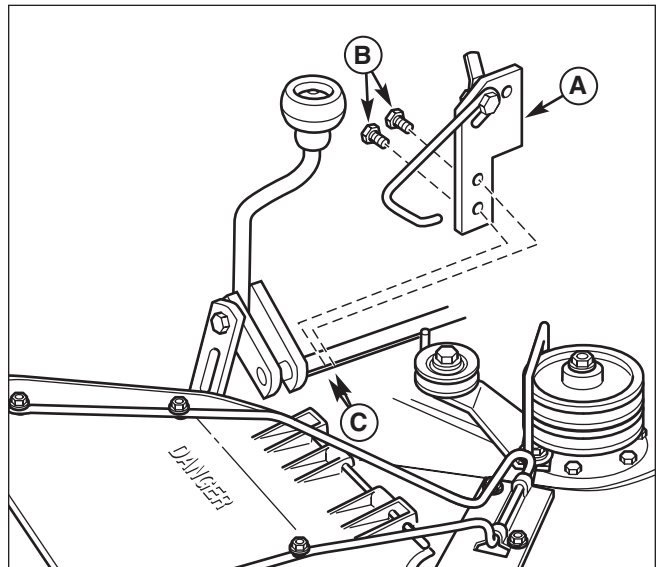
Install Deflector Latch Assembly - 38" Mower
